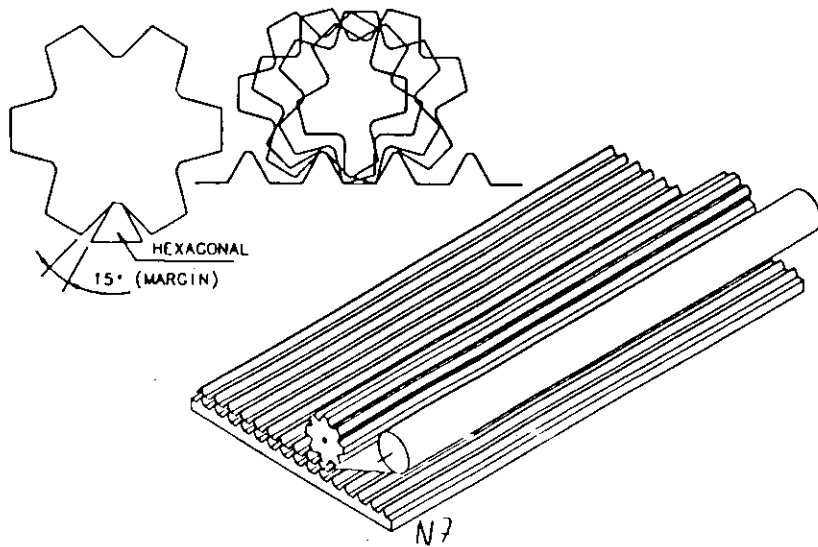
Schematic assembly of monolayer: foil-template and end-combs are shown.
